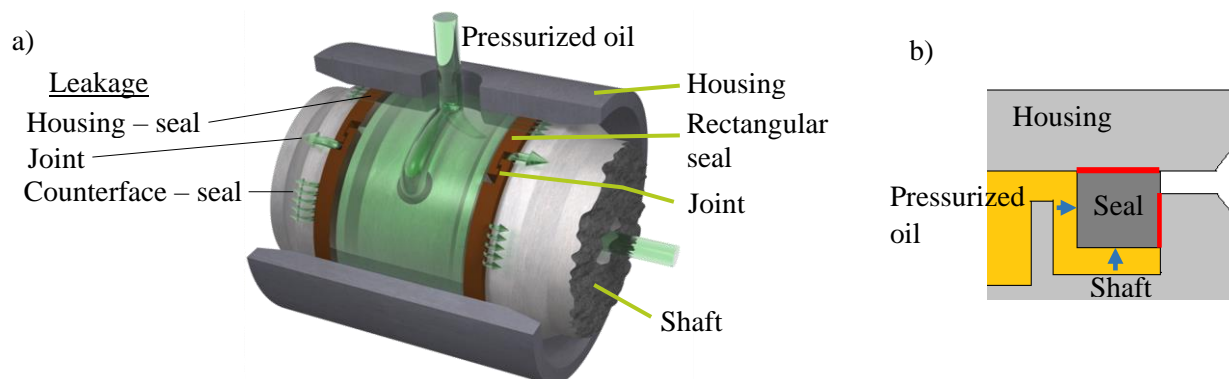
a) Rotary joint with rectangular face seals [80] b) Cross sectional view of a face seal in operation. Red lines represent the contacts seal – housing and seal – counterface.
